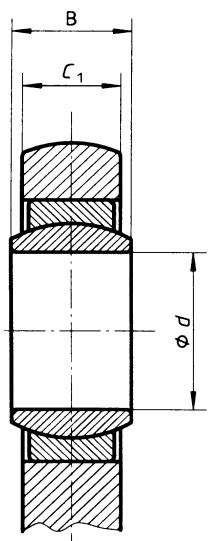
Spherical plain bearing rod end with mounted spherical plain radial bearing (cartridge design)
